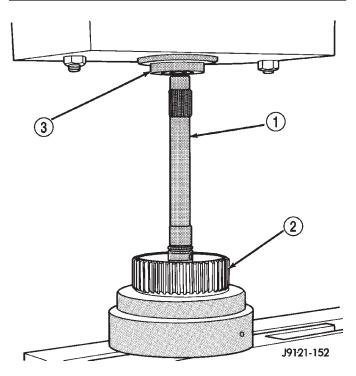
Pressing Input Shaft Into Rear Clutch Retainer
